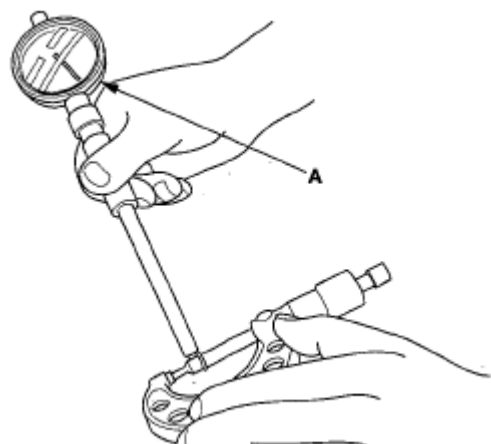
Identifying Gauge At Zero To Shaft Diameter
